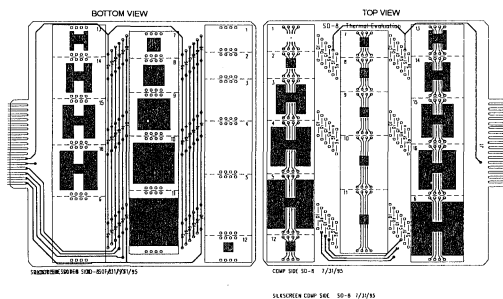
Both Sides of the 4.5"x5" SO-8 Thermal Board. Complete scale drawings is shown in section 5.
